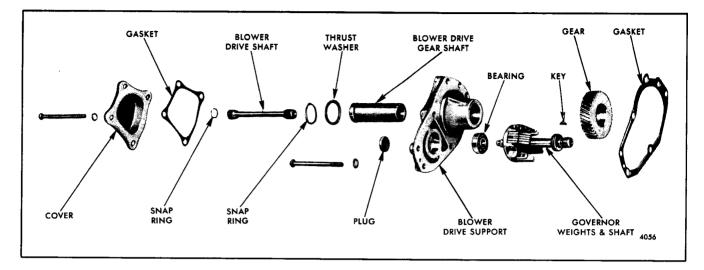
Blower Drive Support Assembly Details and Relative Location of Parts
